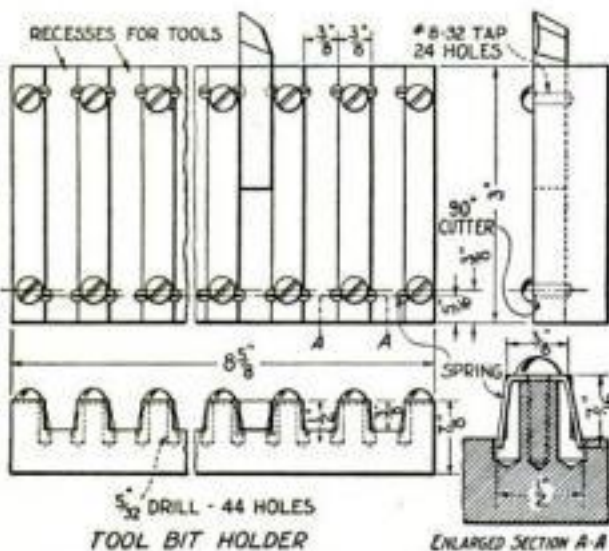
The holder is a slotted aluminum plate with steel wire springs to retain the tool bits.
